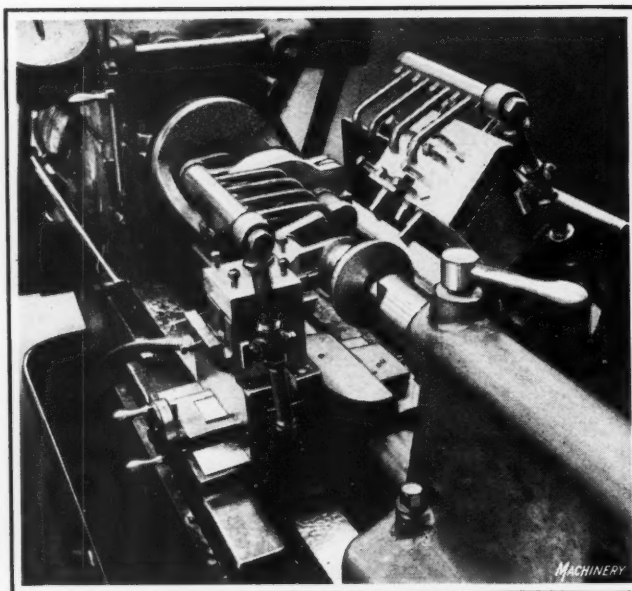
Crankshaft End Bearings being machined with the Part supported by a Spindle Fixture
